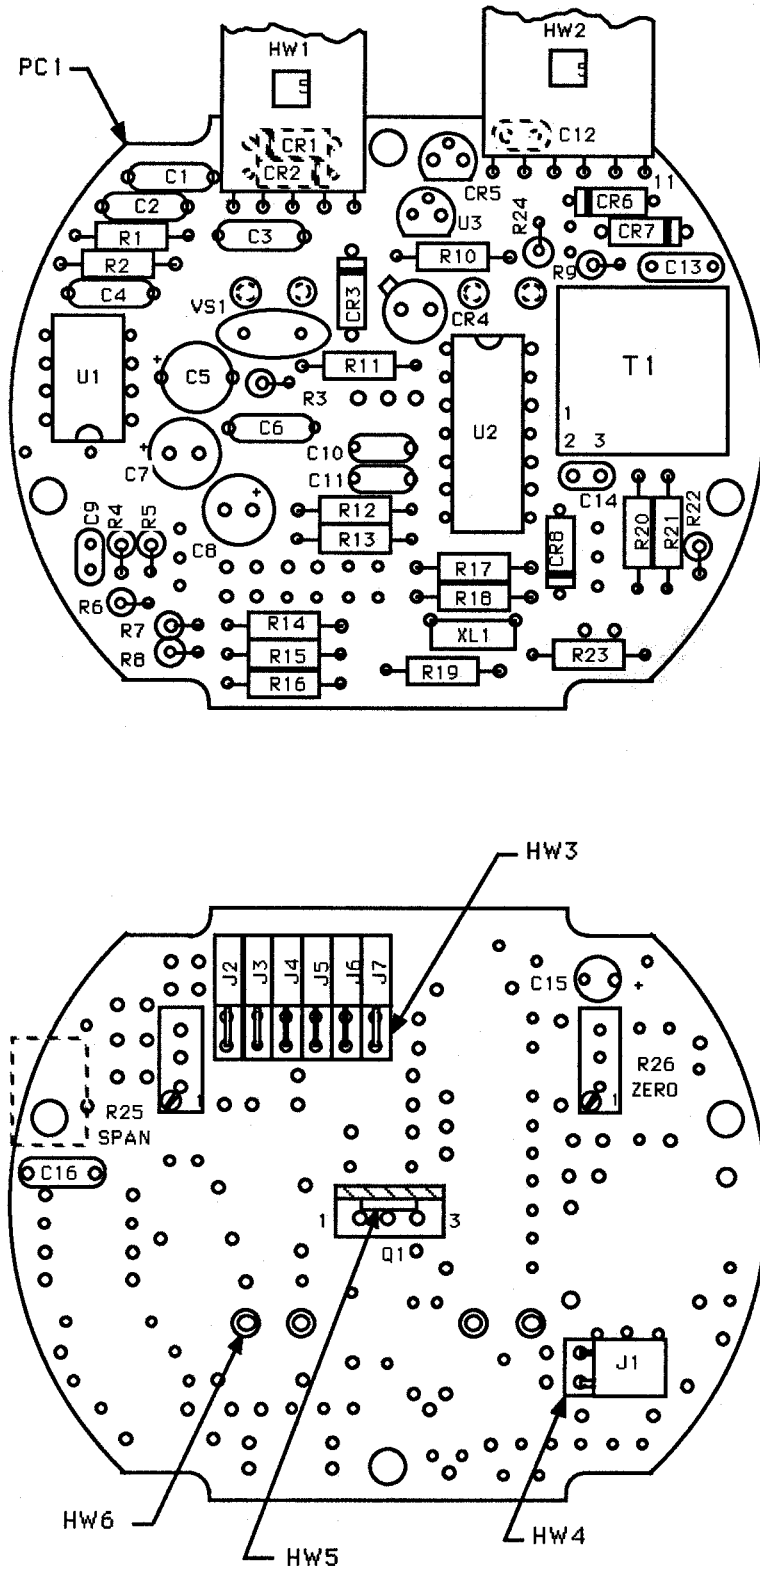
Printed Circuit Board Assembly 1 for the EP-FDX Transmitter with HP Housing
